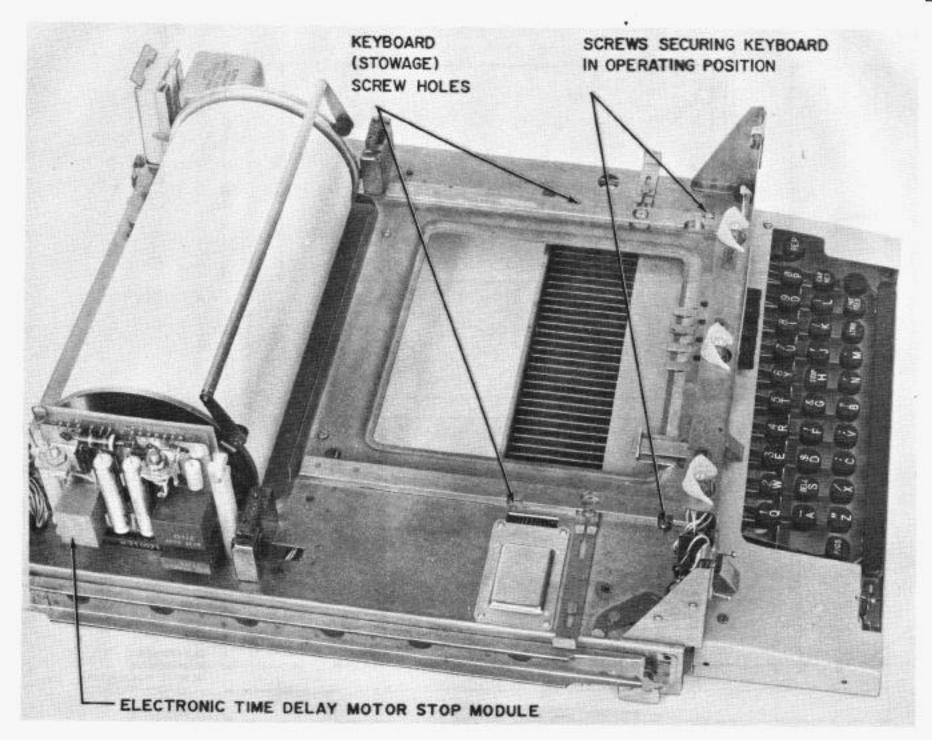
Left Side View of Chassis Electrical Equipment CH-561/UG
